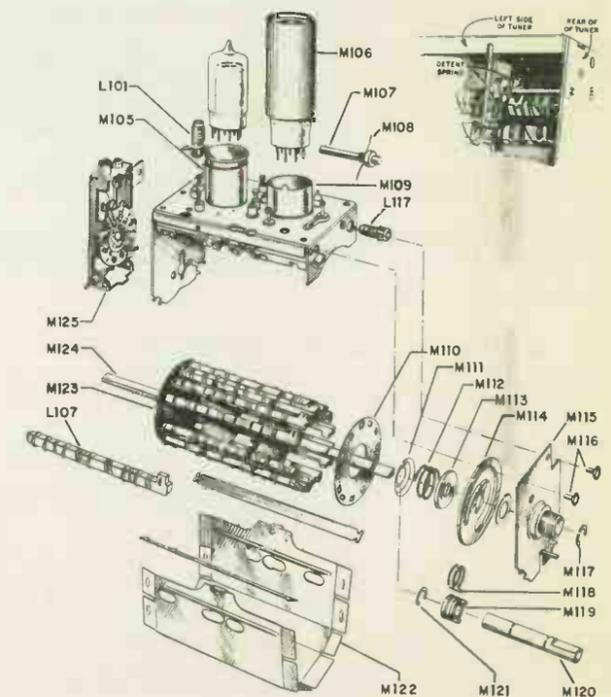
Exploded View of VHF Tuners 94E163-1 and -2. Partial illustration shows placement of detent spring and detent roller.
